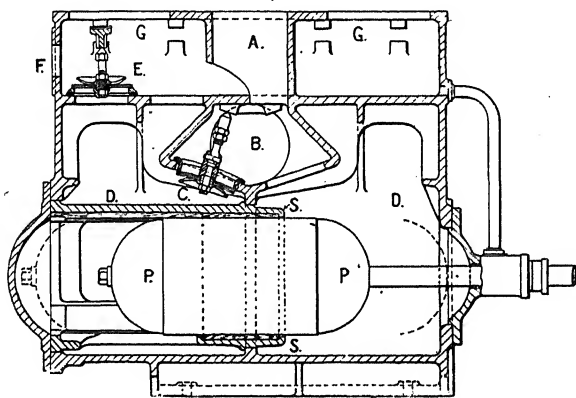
Section of horizontal double-acting "displacement" vacuum pump fitted with torpedo plunger.
